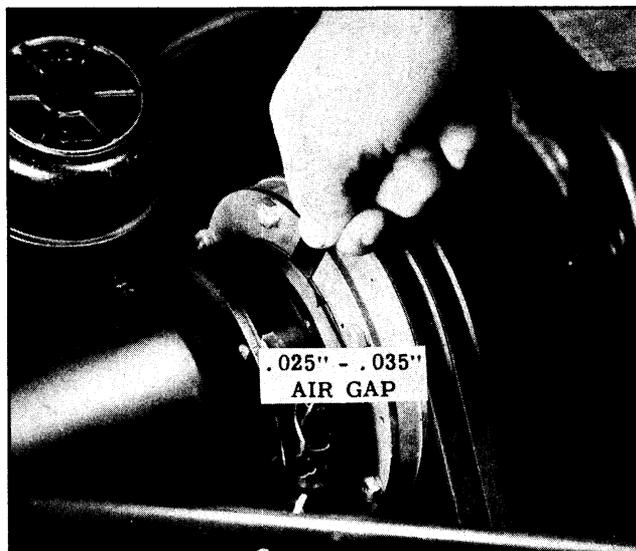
Checking "Inner" Clutch Plate Air Gap
